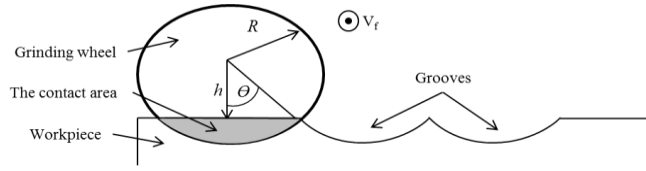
Grinding tool in contact with the workpiece (the angle θ is exaggerated for illustration purposes)
